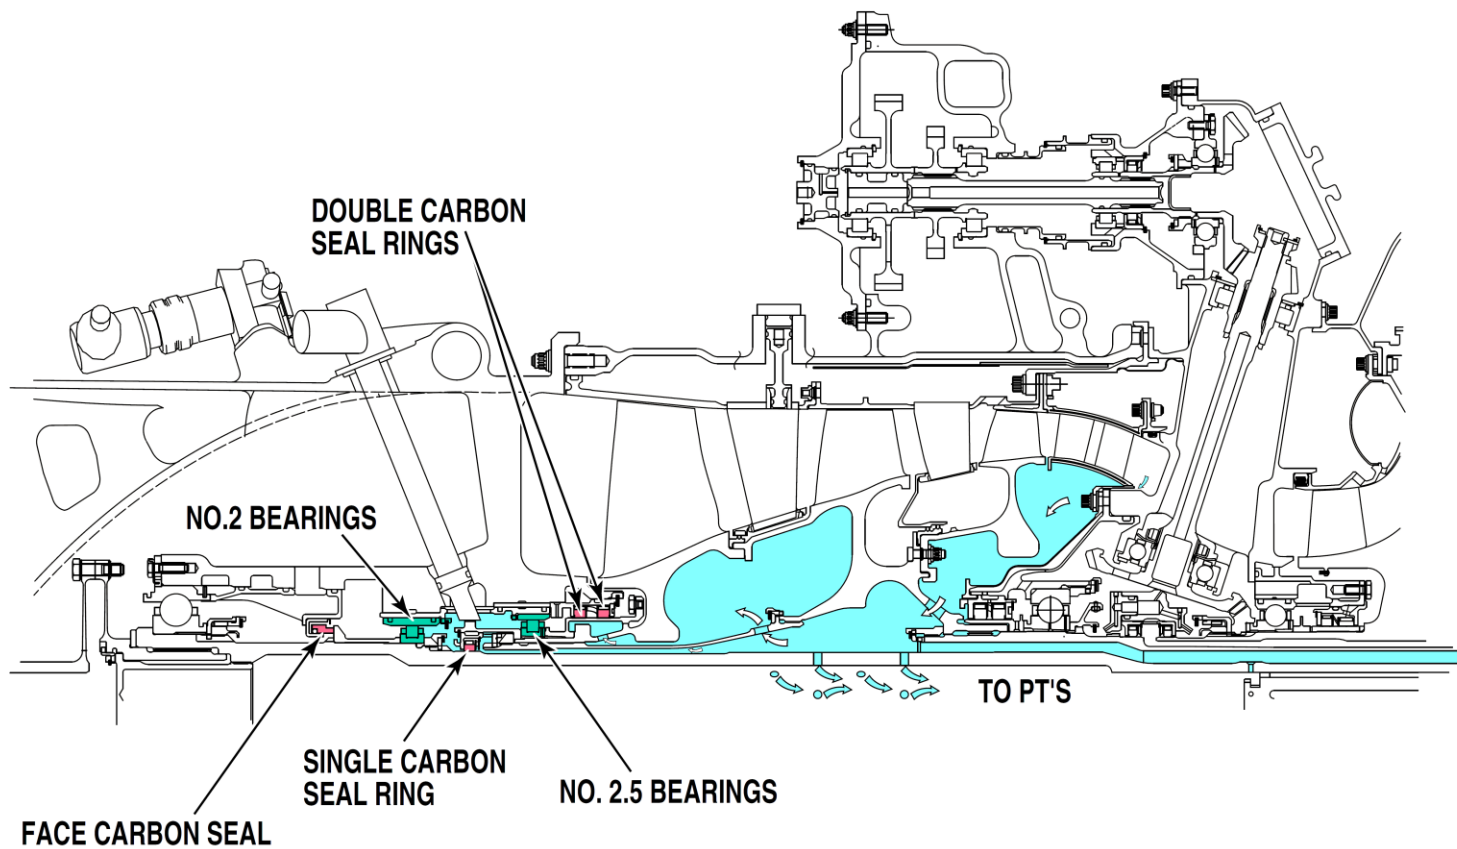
Distribution to No. 2 & 2.5 Bearing Cavity
